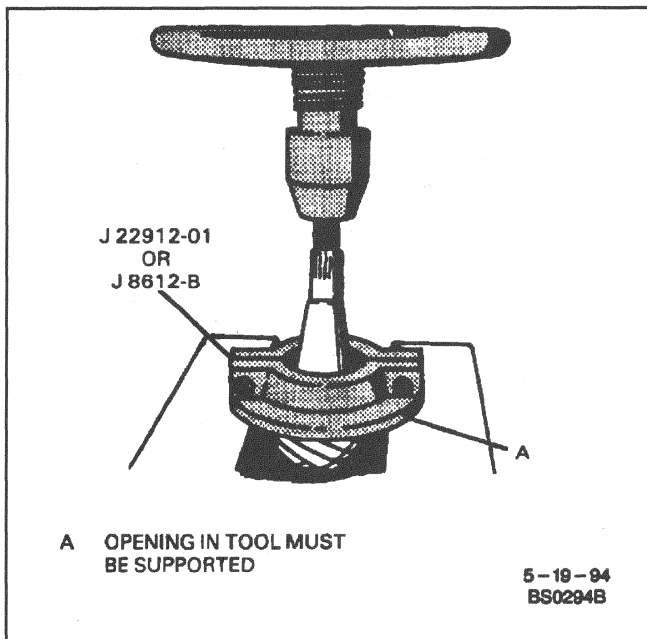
Removing Differential Drive Pinion Gear Inner Bearing
